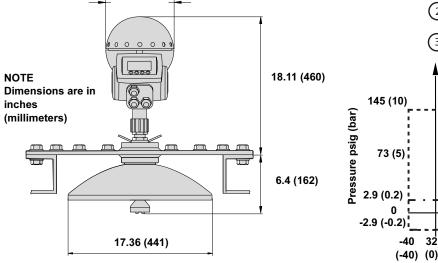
Parabolic Dimensions for Stainless Steel Flange
